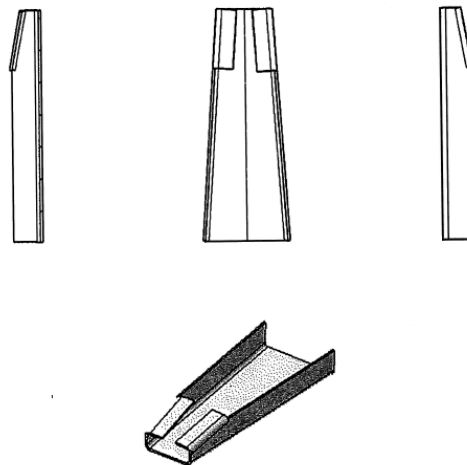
Manipulator finger masks which are welded on work tools and parts requiring movement for easier manipulator operation.
